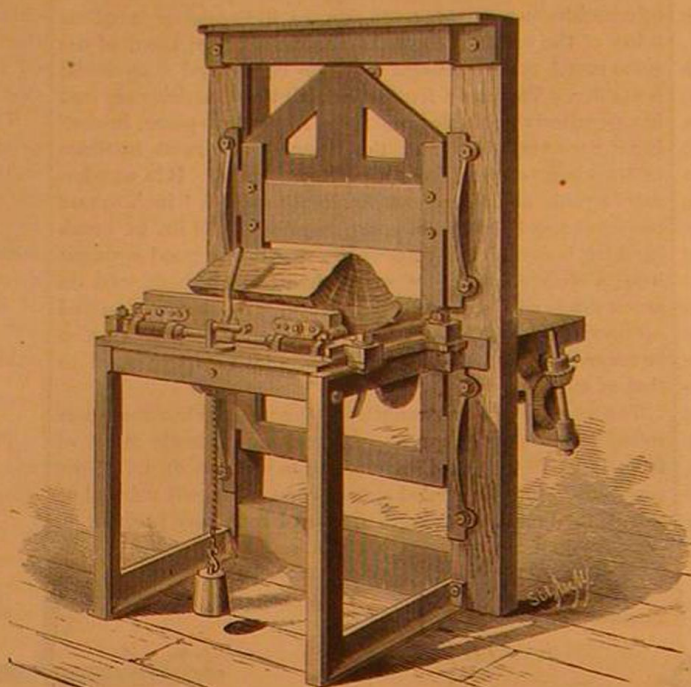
TREVOR & CO'S SHINGLE-CUTTING MACHINE.
